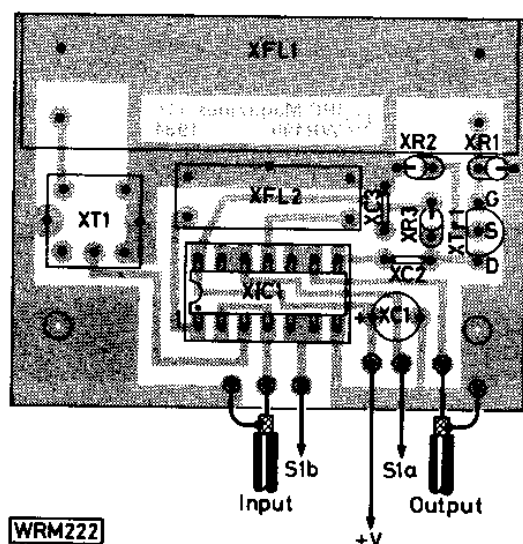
The track pattern and component layout of the new switching board, shown full size
